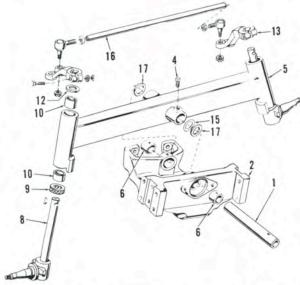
Exploded view of nonadjustable front axle used on MF235 and MF245 Orchard models. Refer to Fig. 2 for legend except for washers (17) and tie rod (16).
